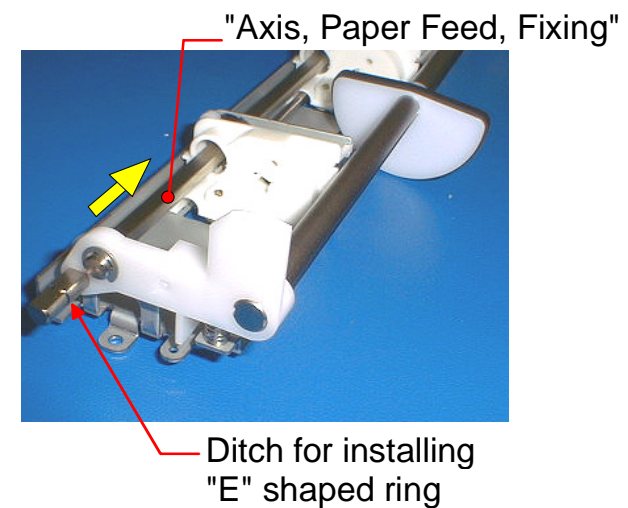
Installing "Axis, Paper Feed, Fixing"
